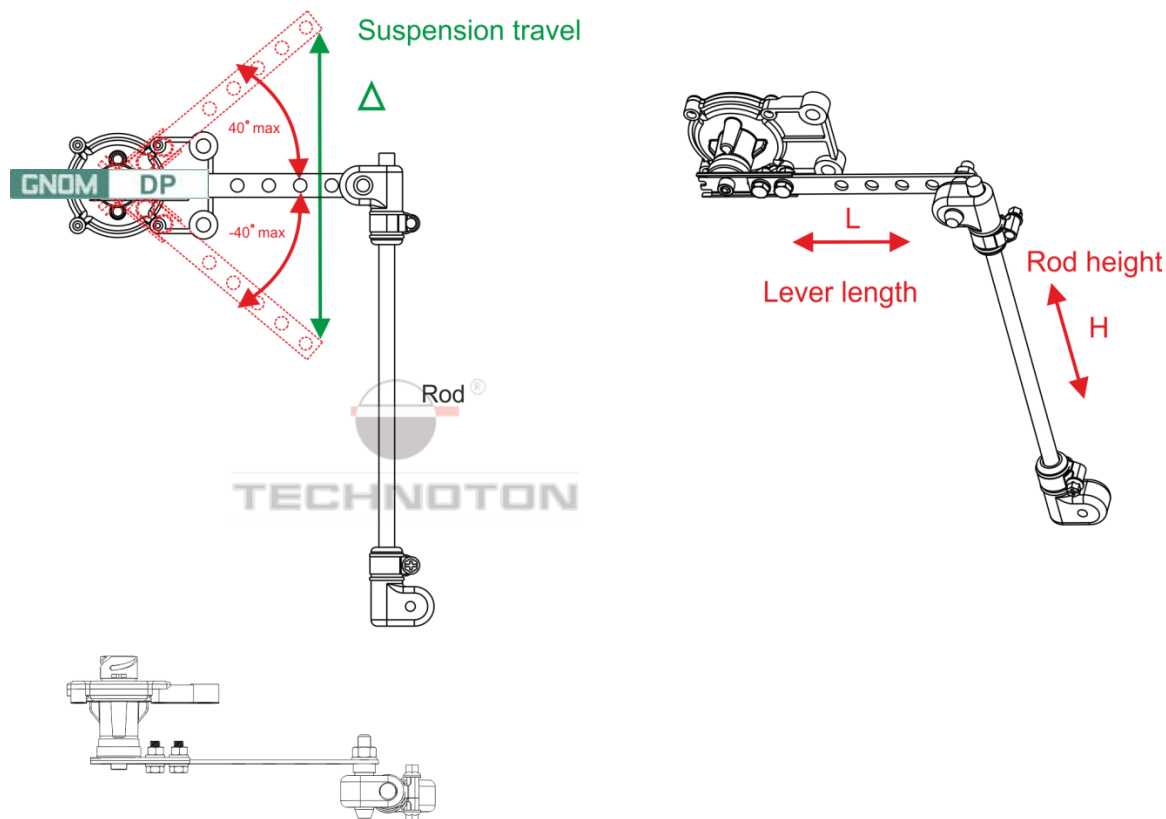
Adjusting GNOM MK DP rod and lever for GNOM DP mounting
